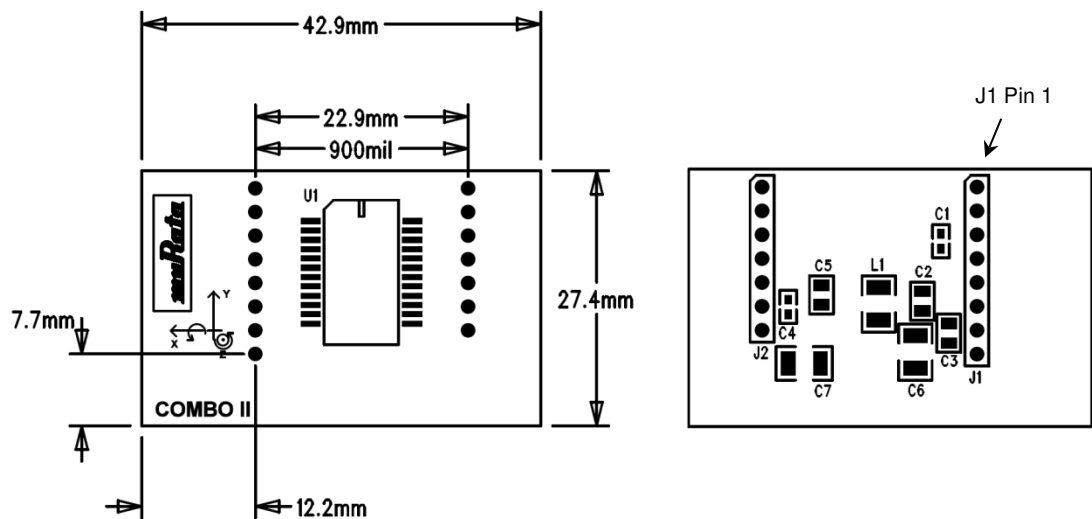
TOP (left) and BOTTOM (right) view assembly drawings for SCC2000 series PCB (aspect ratio not 1:1).
